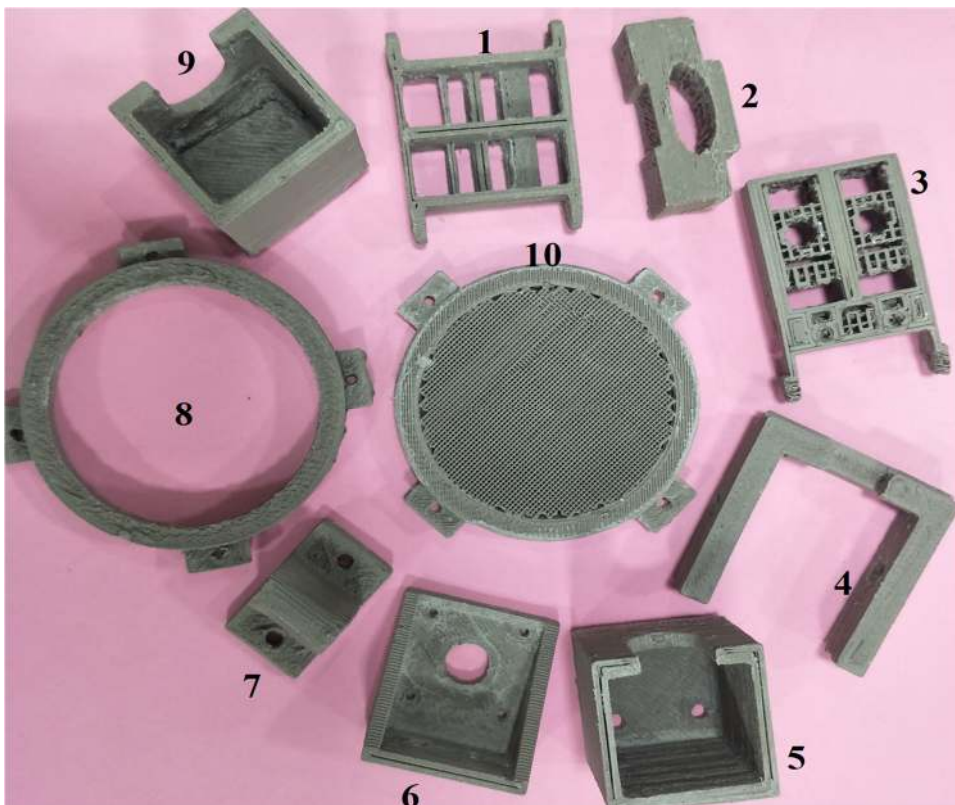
Eco-friendly components printed using 3DP technique 1. Arduino rack 2. Bearing holder 3. Arduino rack upper head 4. Support channel 5. Motor mount with fillet 6. Motor mount 7. Rod end holder 8. Filter ring 9. Motor cover 10. Filter end cap.
